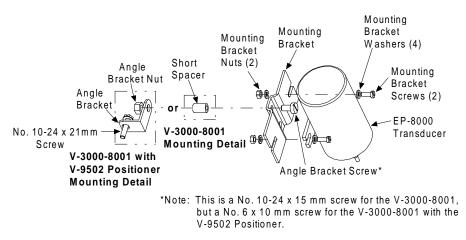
EP-8000-101 Mounting Kit for Installation of the EP-8000 to a V-3000-8001 Valve Actuator with or without a V-9502 Positioner
